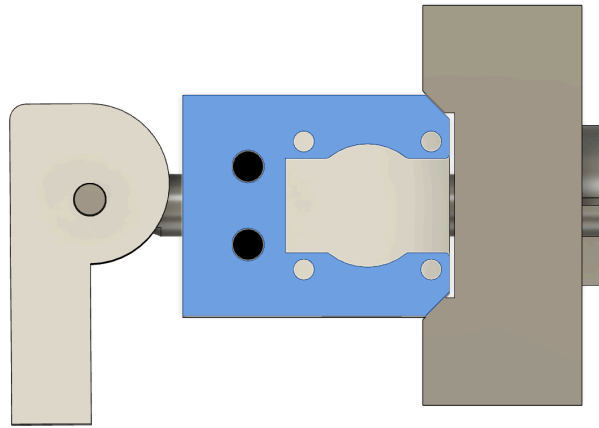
Top-Down View of the Locking Mechanism. Note the blue Z-axis frame's shape locks into the dark grey main frame. The slight gap between the Z-axis frame and main body ensures that the primary contact surfaces are the chamfered edges rather than their flat faces, allowing the full force of the cam mechanism to be applied to these edges and therefore allowing them to guide the Z-axis frame into its proper engagement position.
